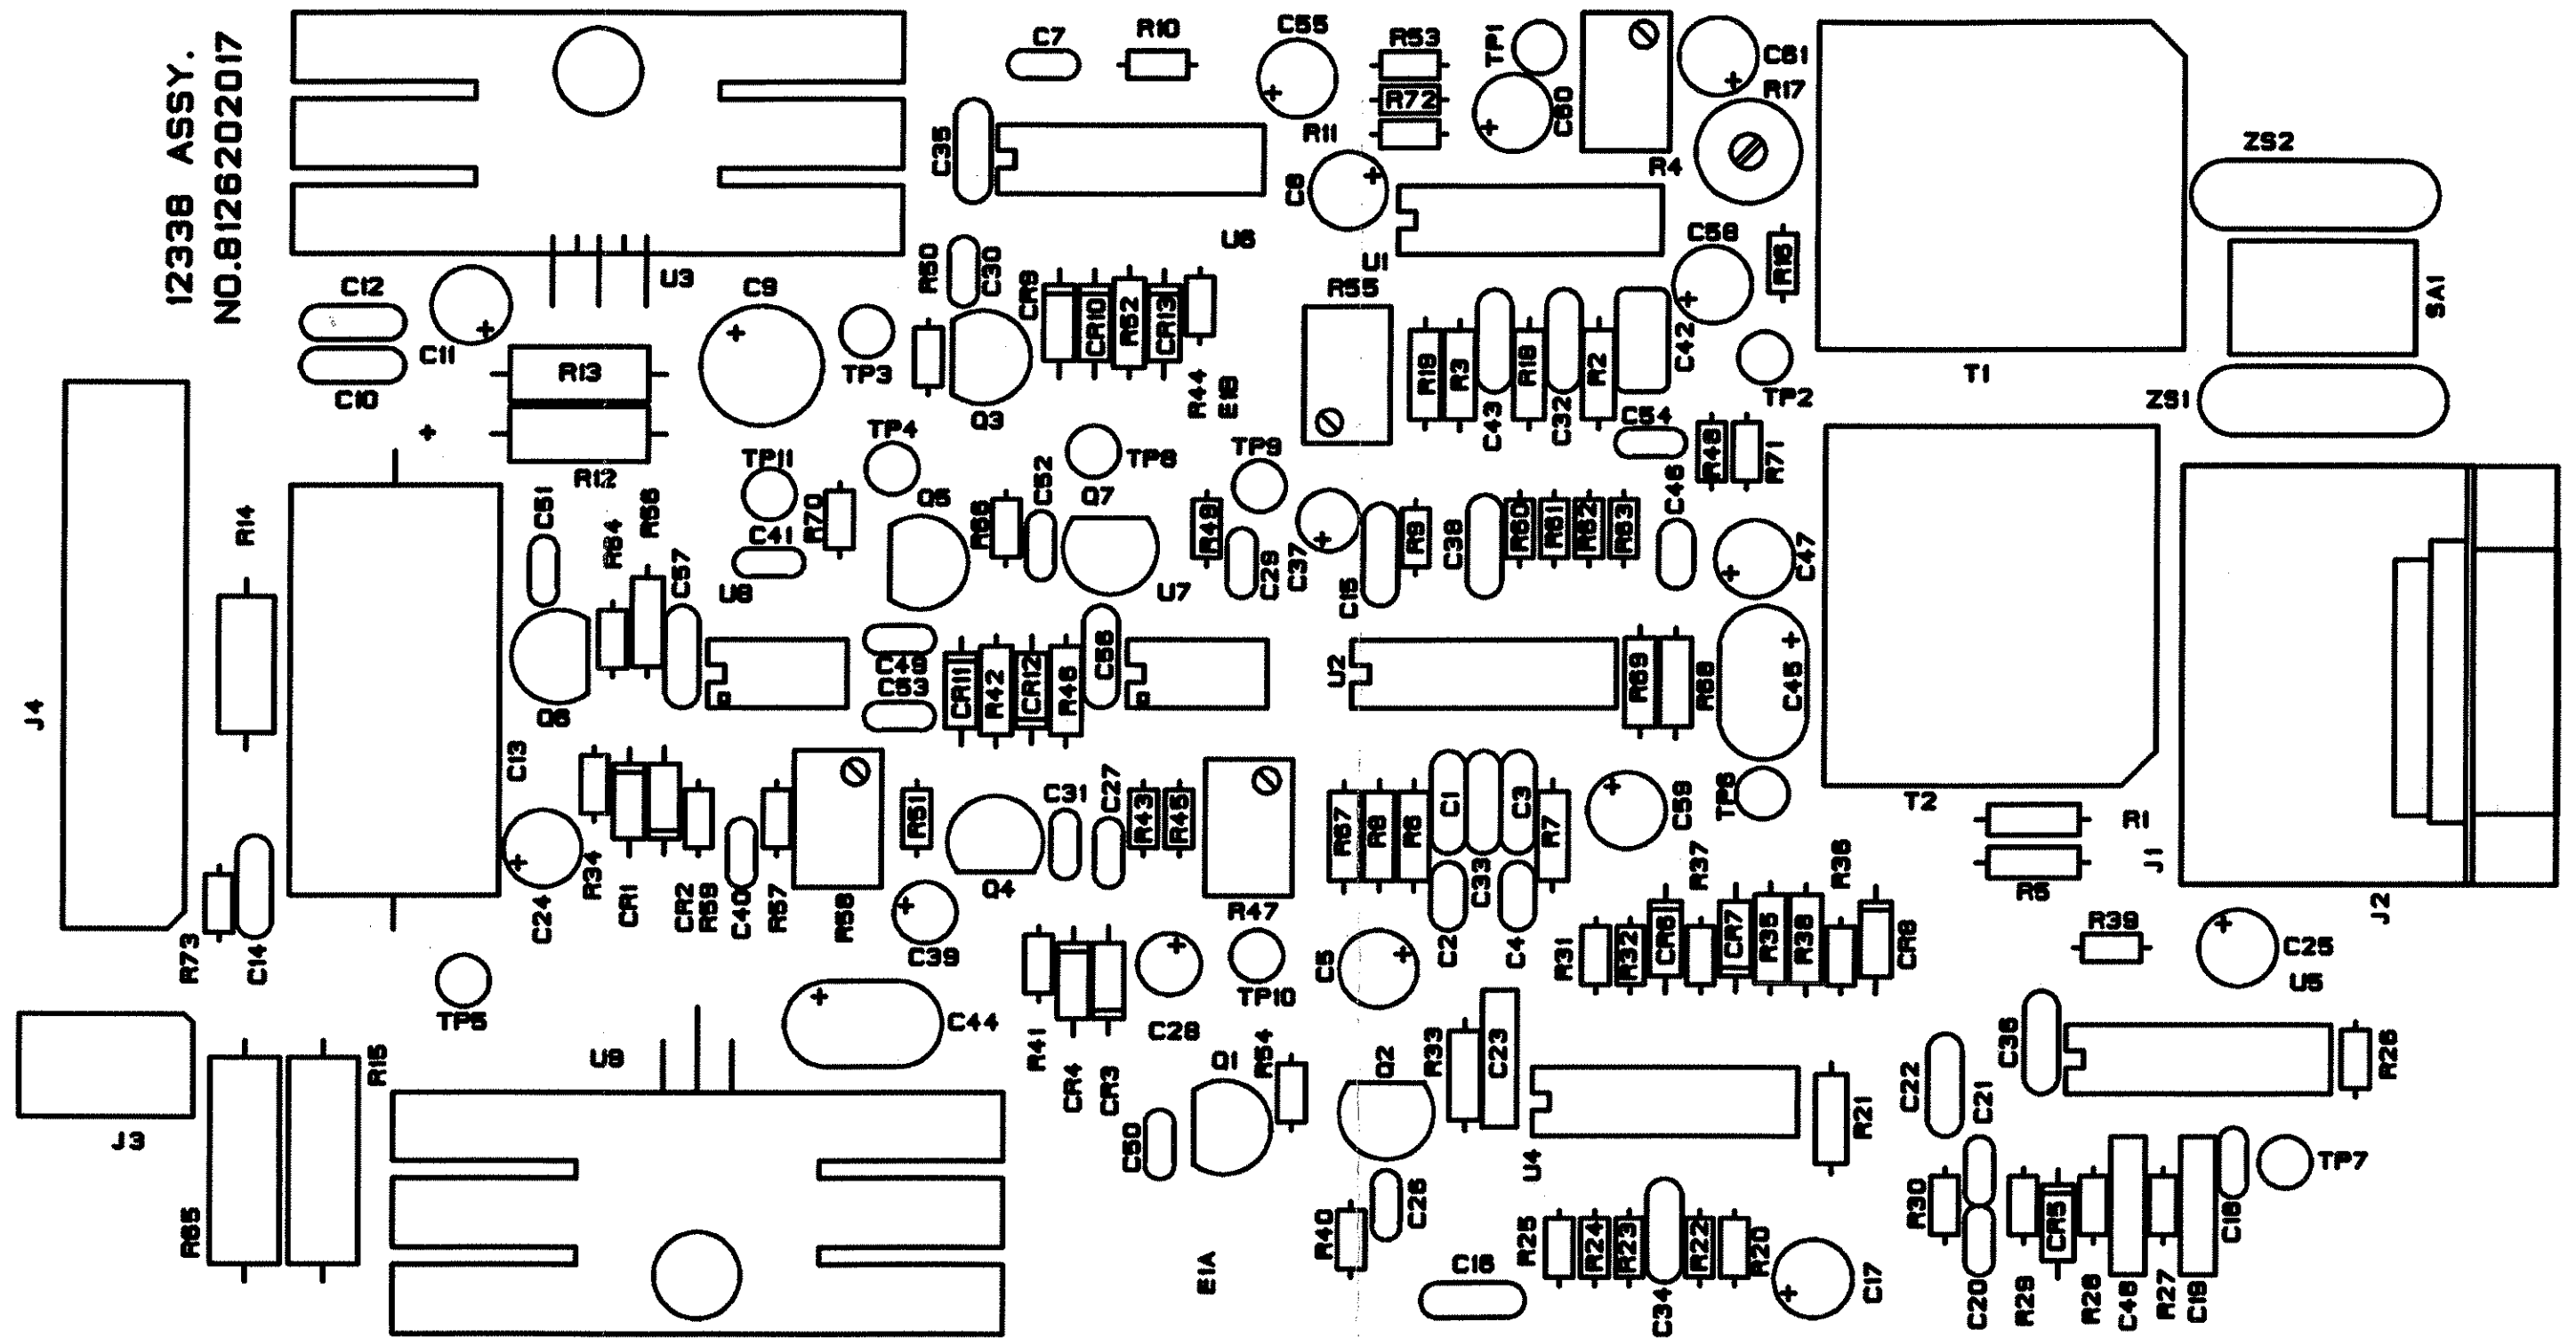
PC Assembly Squelch Speaker, page 1 of 2.
